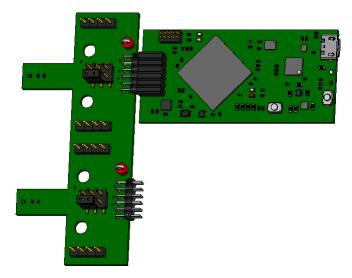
Sensor Control Board Connected to A2 Part of EVM
